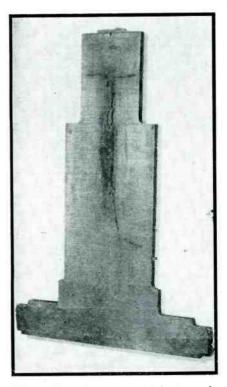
Etched section of defective axle, showing flaws revealed by supersonic testing
